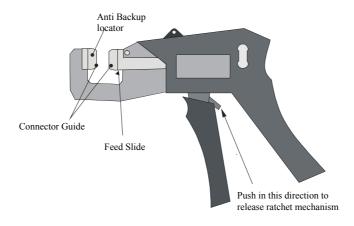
Hand-Crimping Tool for 15-Pin D-Type Connector
